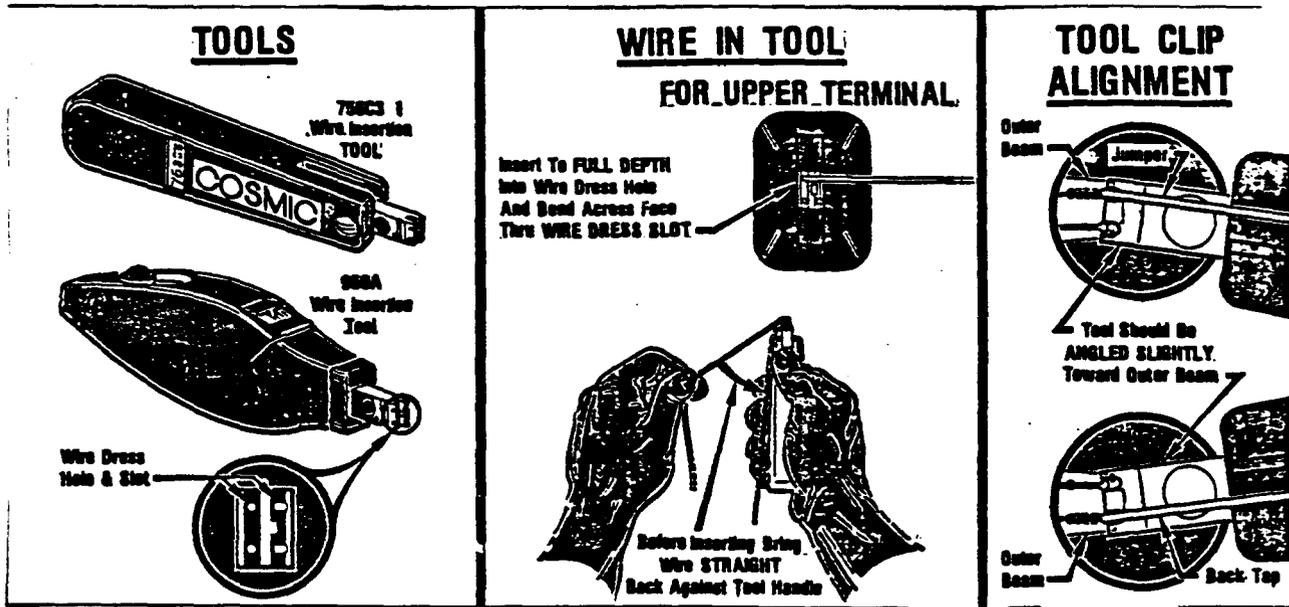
METHOD OF DRESSING JUMPERS AND USE OF TOOLS ON 112 TYPE CONNECTING BLOCK.
